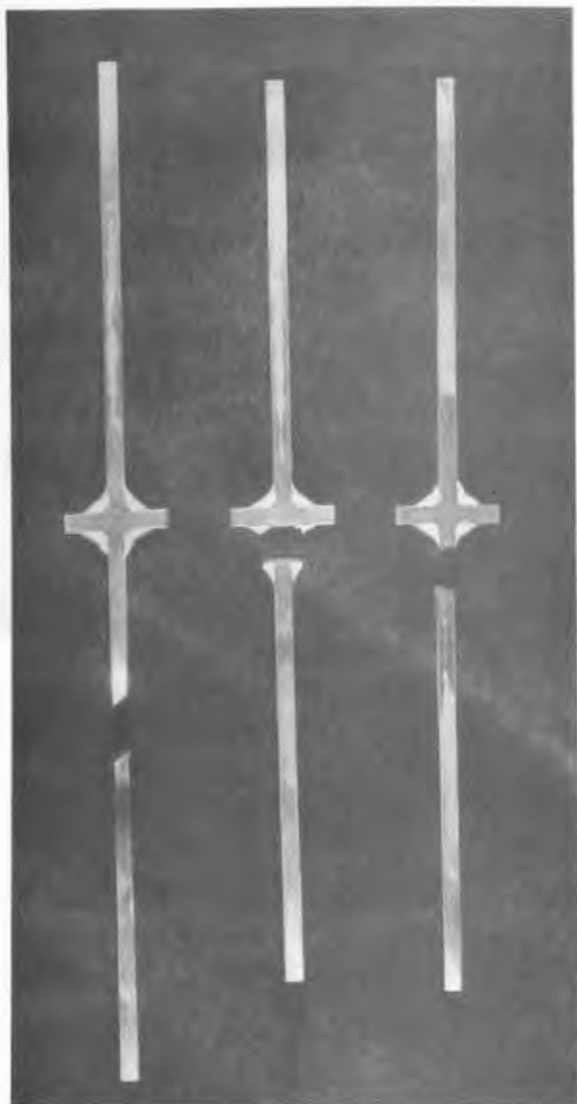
Cruciform welded joint between 10 mm sheets
